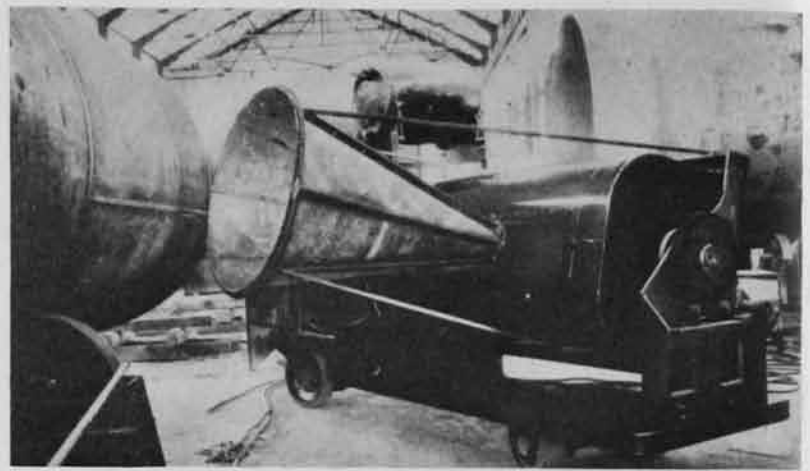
Every inch of the 400,000 lin.-ft. of welds required in fabricating 45,000 tons of pipe is photographed by these X-ray machines for inspection. Welded seams are X-rayed in 30-in. lengths. Films are developed immediately after exposure to permit defective welds to be replaced before pipes leave welding frame.
